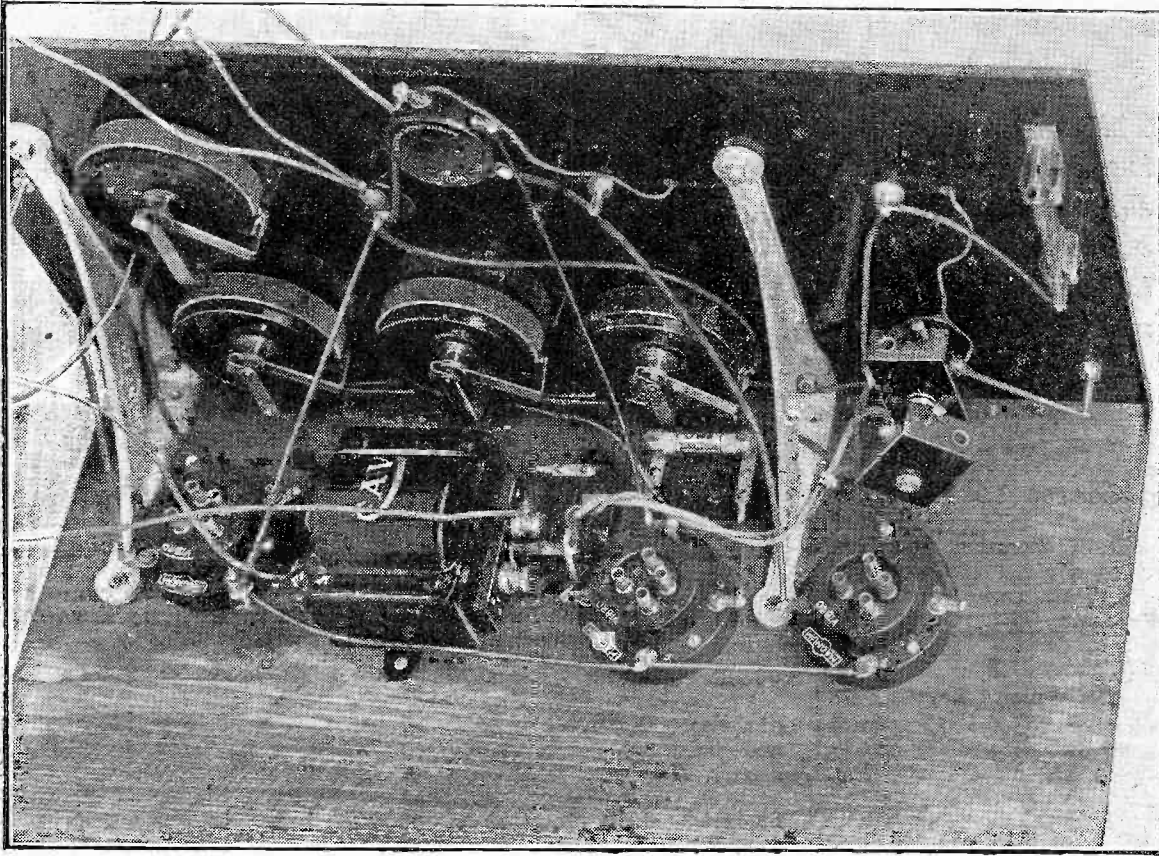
The holder for the H.F. transformer is fitted to the panel, the valve holders being secured to the baseboard.
